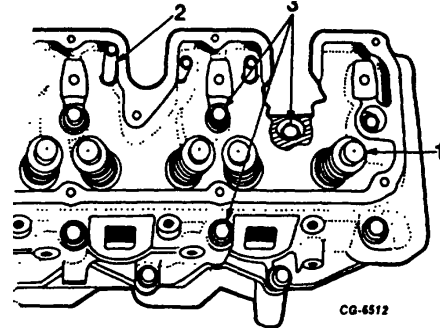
Removing Valve Caps, Push Rods and Head Mounting Bolts
